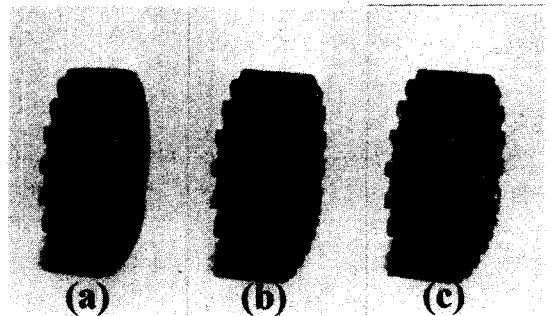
Cold forged spur gear (guiding type, h=10mm)
